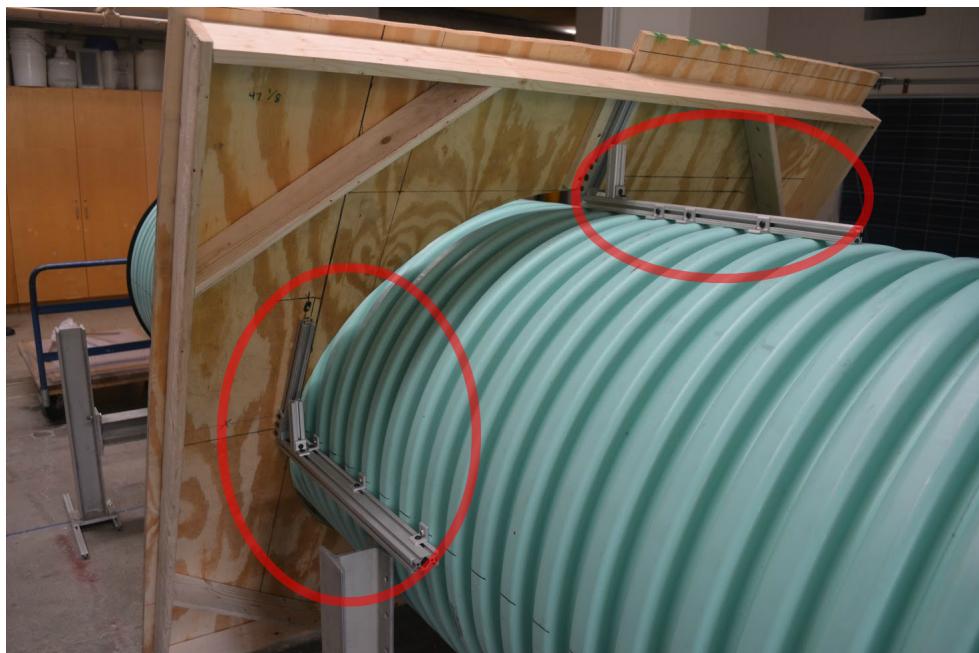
The plywood board jig used to make the 30°cut, circled in red.
